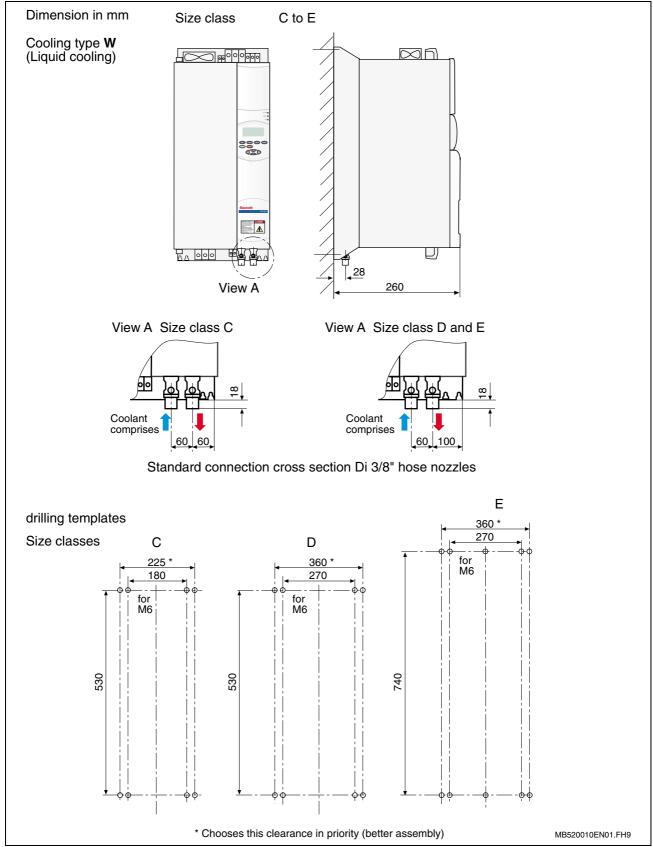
Dimension sheet for cooling type W, size classes C, D, E
